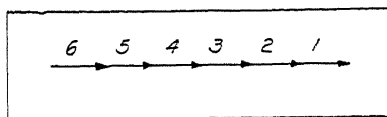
Example of a procedure and sequence of welding by the step-back method.
